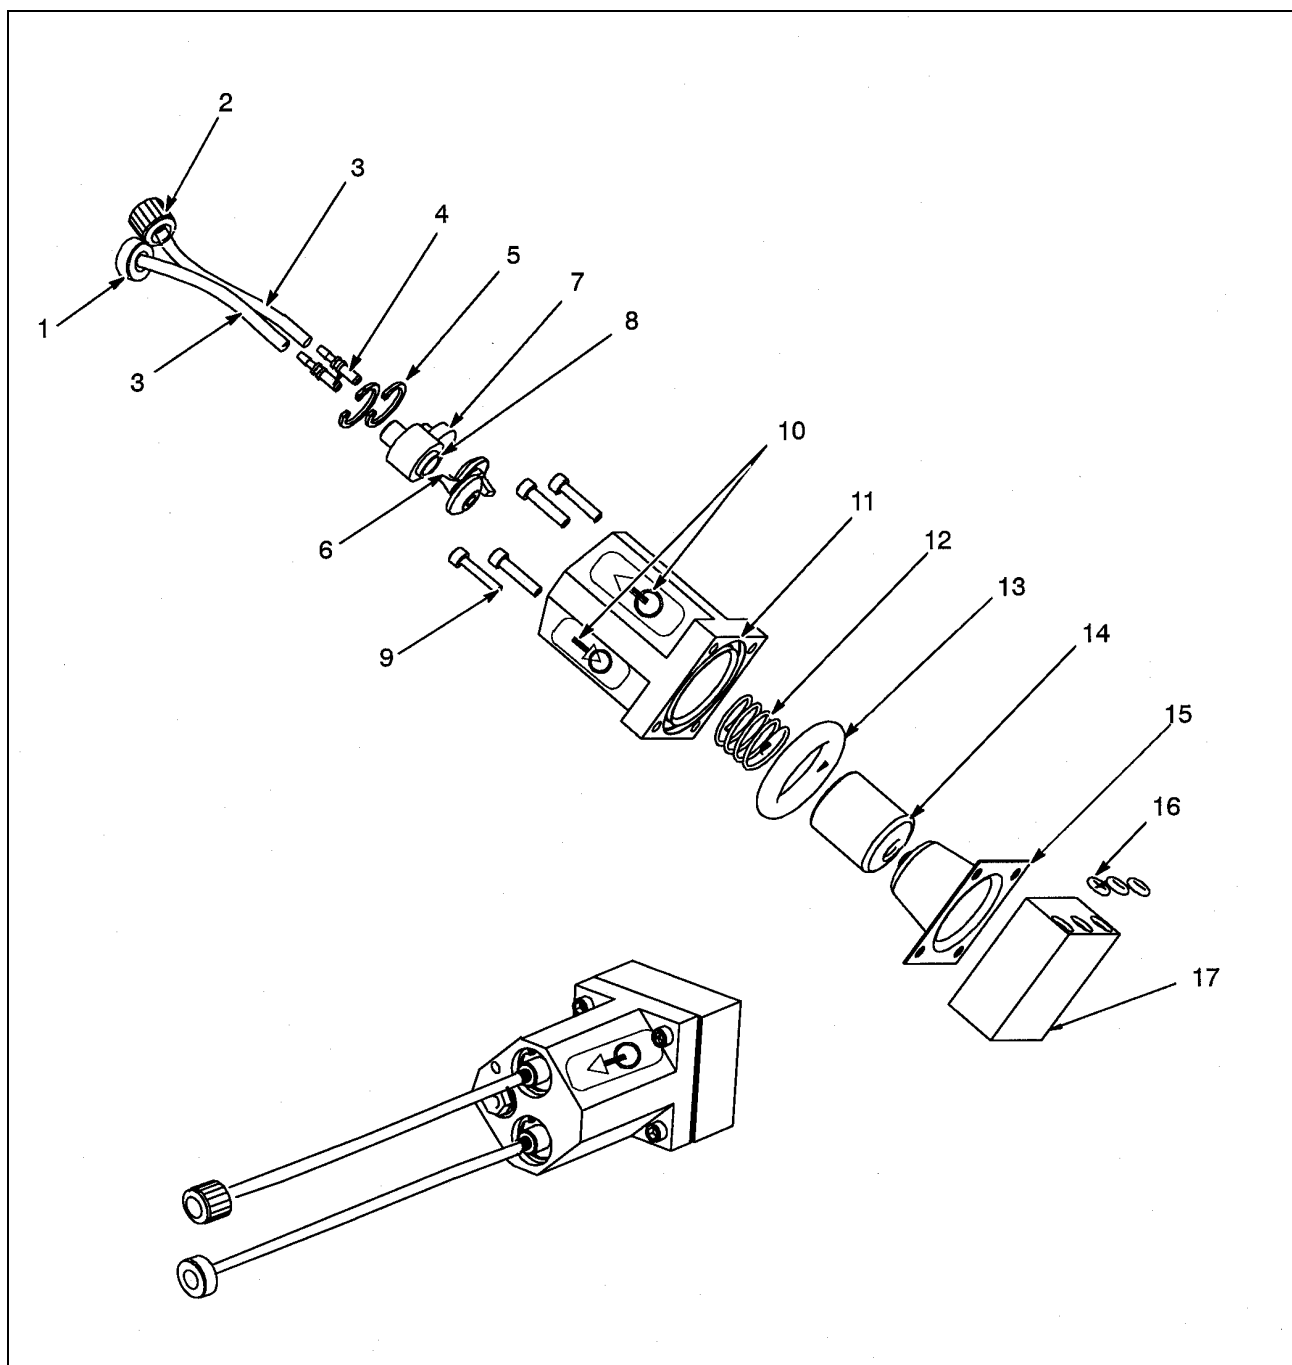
Autoflush Manifold (Triumph Printer Only)
